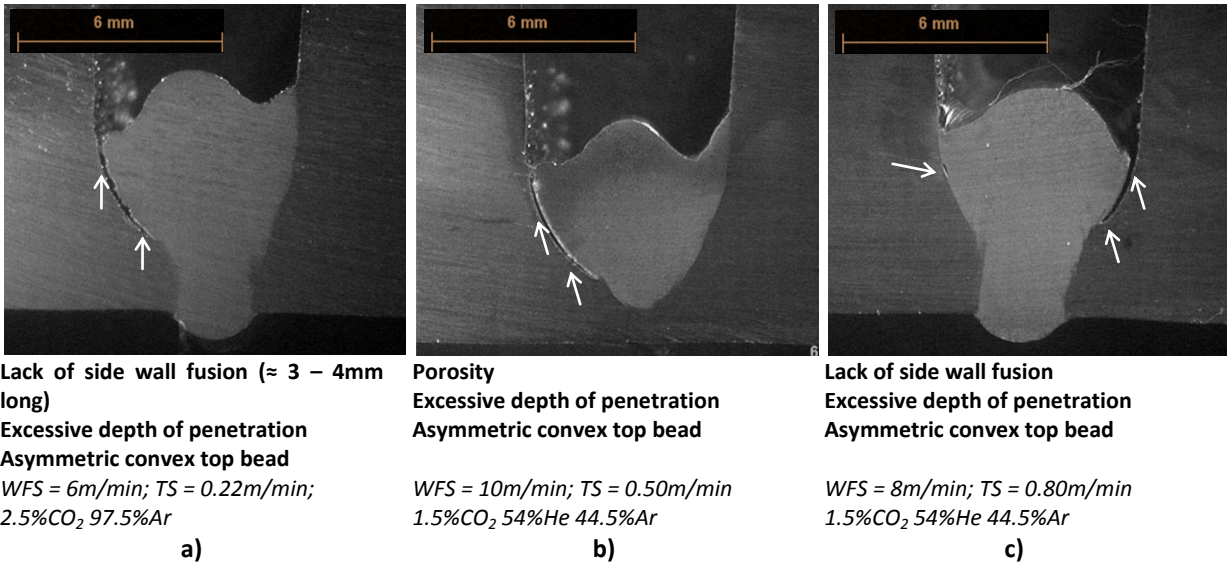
Macrostructures illustrating defects on welding of narrow groove pipe using STT.
